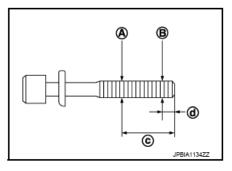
Measuring Cylinder Head Bolt Outer Diameter Courtesy of NISSAN NORTH AMERICA, INC.
